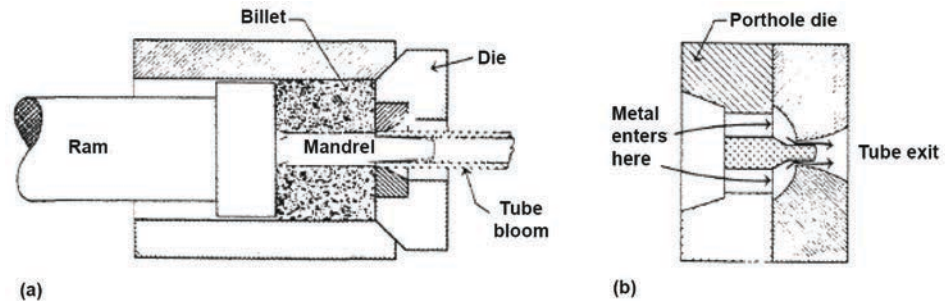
Direct extrusion of aluminum alloy tube bloom (a) for cold drawing (b)
